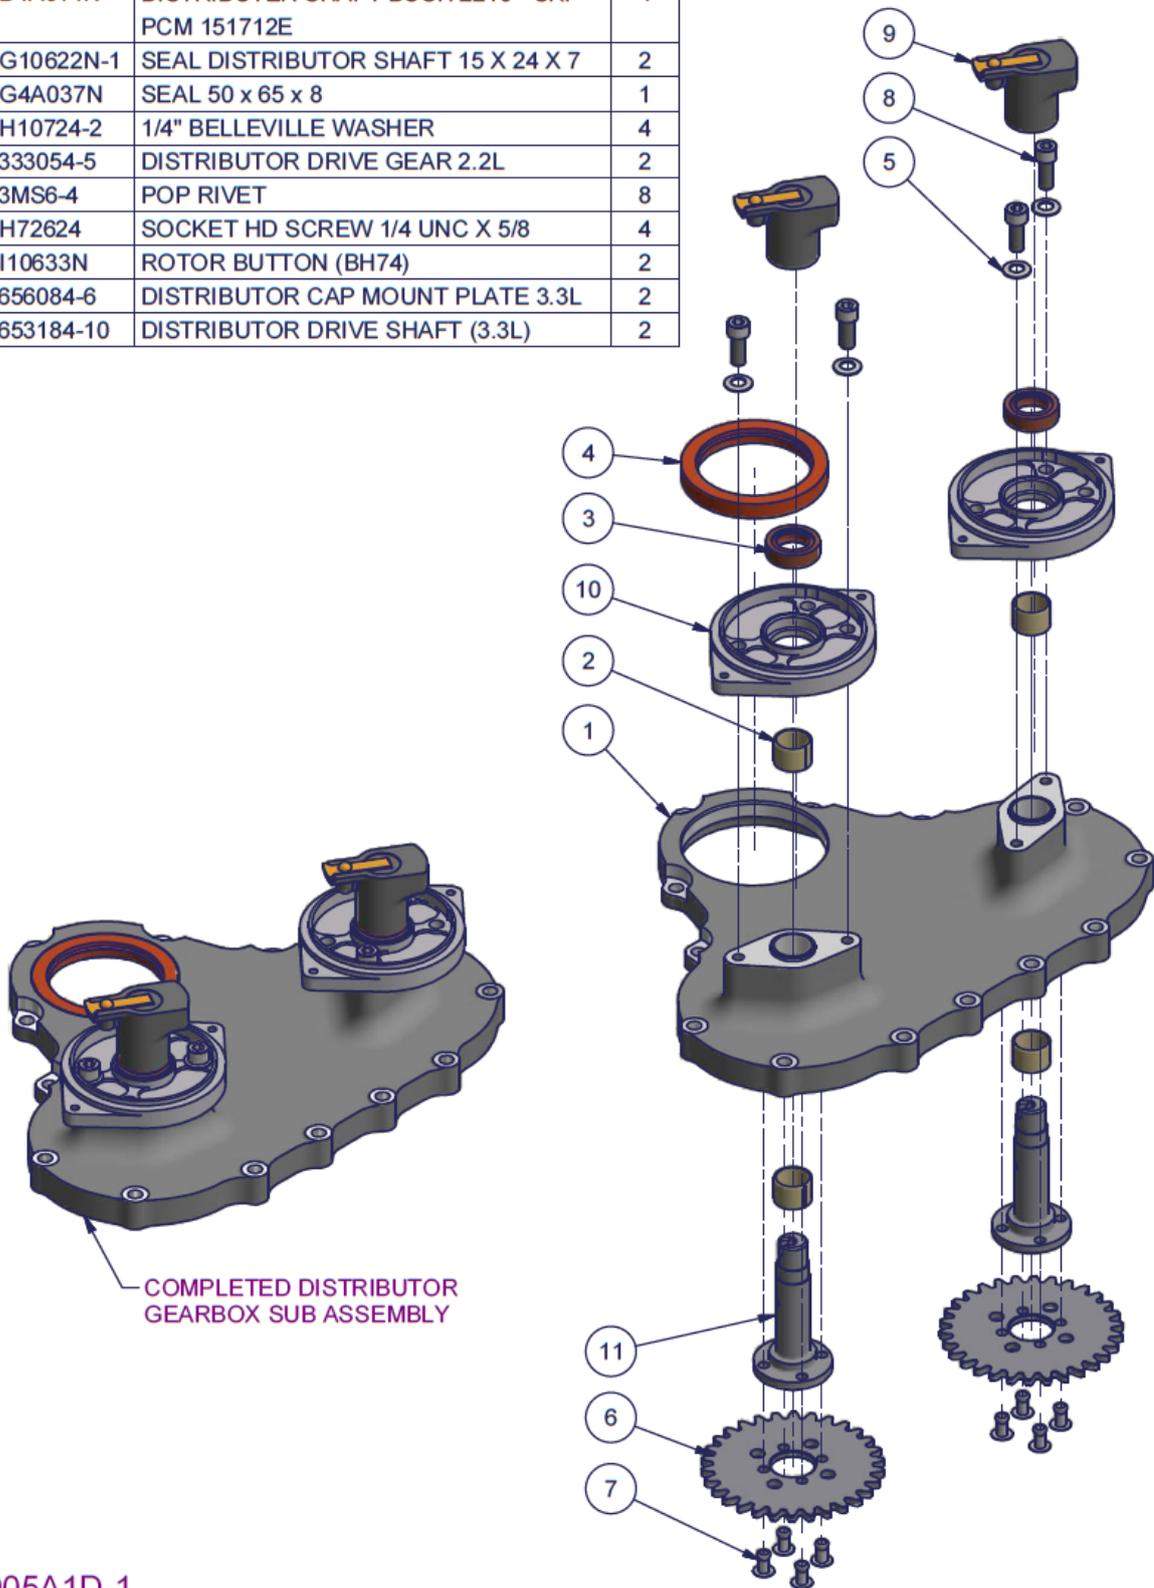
3300 Distributor gearbox subassembly - Parts list
